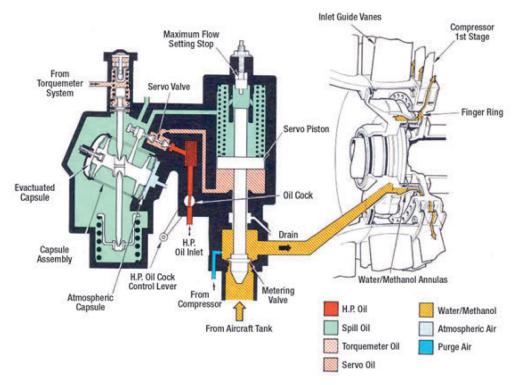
Compressor inlet injection system as on a turboprop engine.
